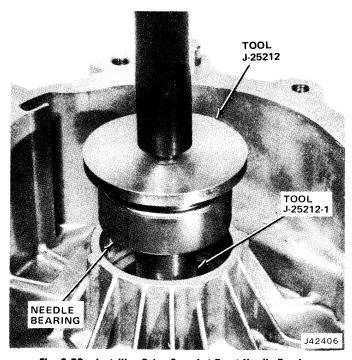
Installing Drive Sprocket Front Needle Bearing
